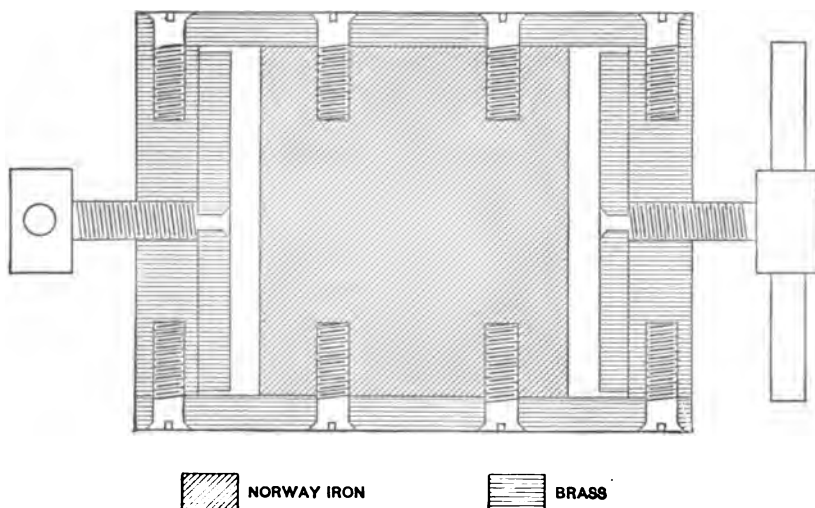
Showing the Form of Yoke used with Strips of Sheet Metal.
